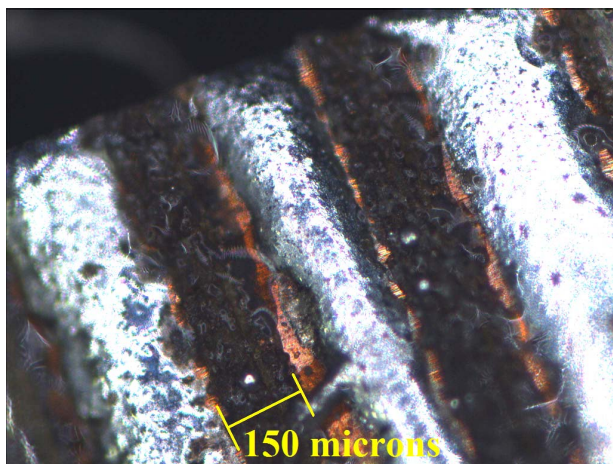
Low melting point solder applied to the end of one of the finished ribbon cables.
